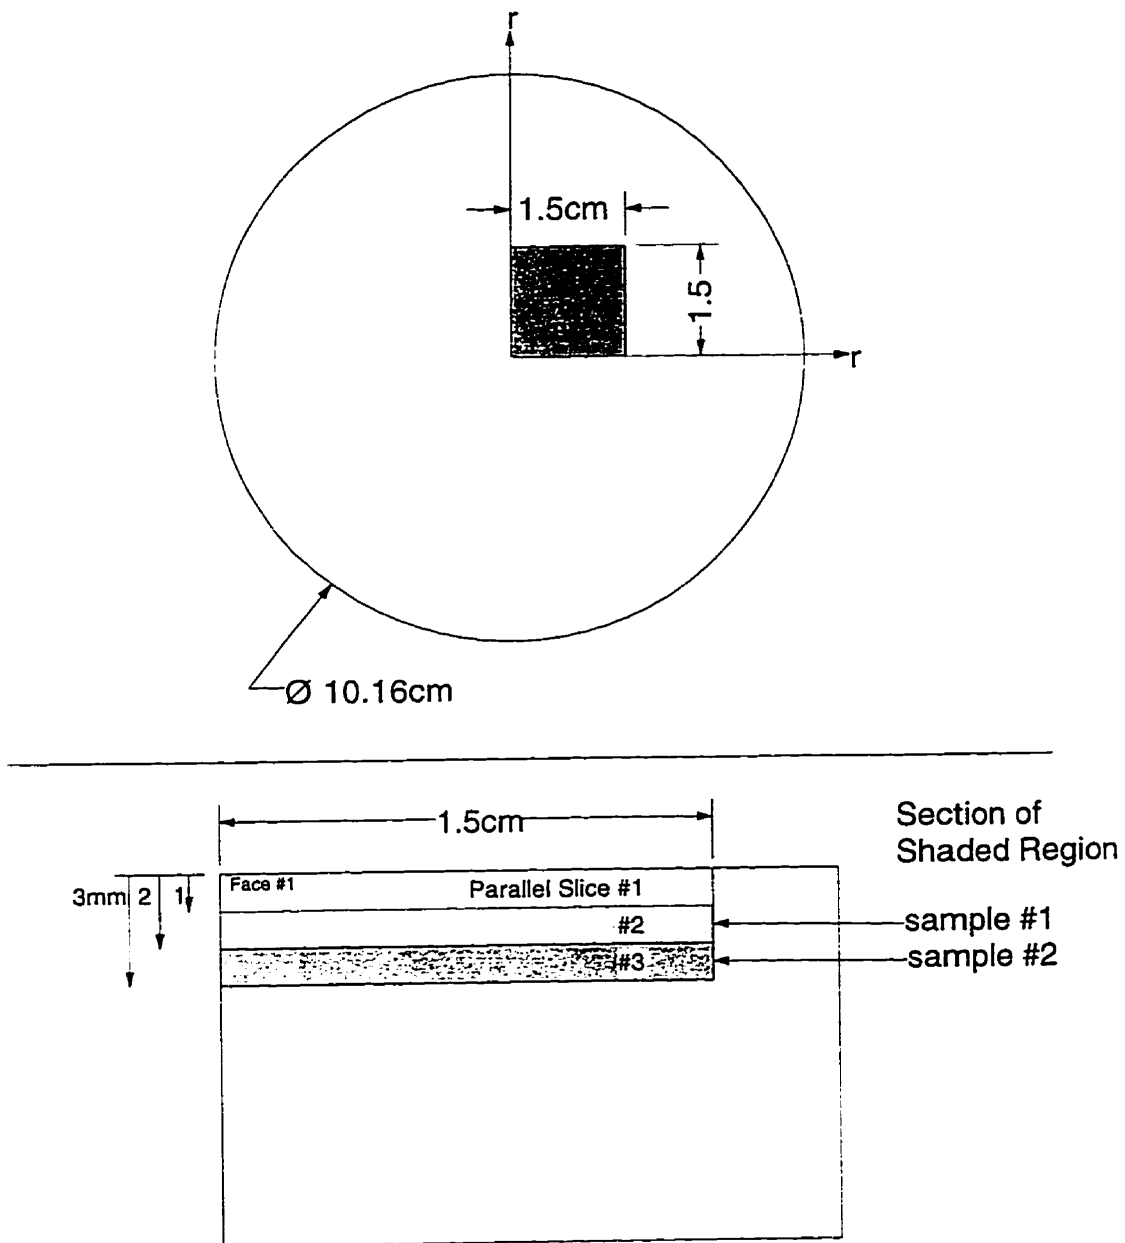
Location in the casting from which the reinforced specimens were removed.
